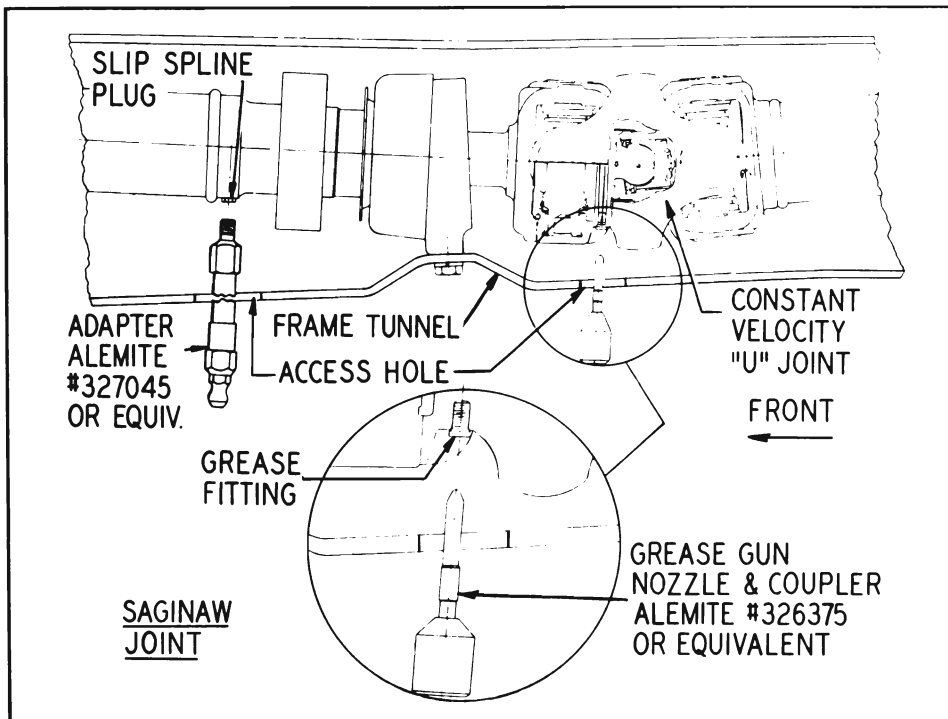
Propeller Shaft Slip Spline and Constant Velocity Universal Joint Lubrication Points
